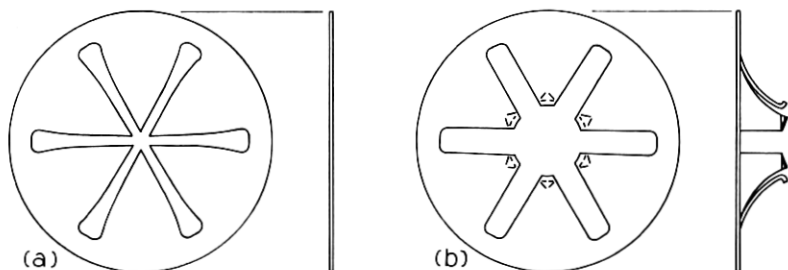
(a) The disk blank after photo etching. (b) The disk ready for installation after hardening and cold forming.
